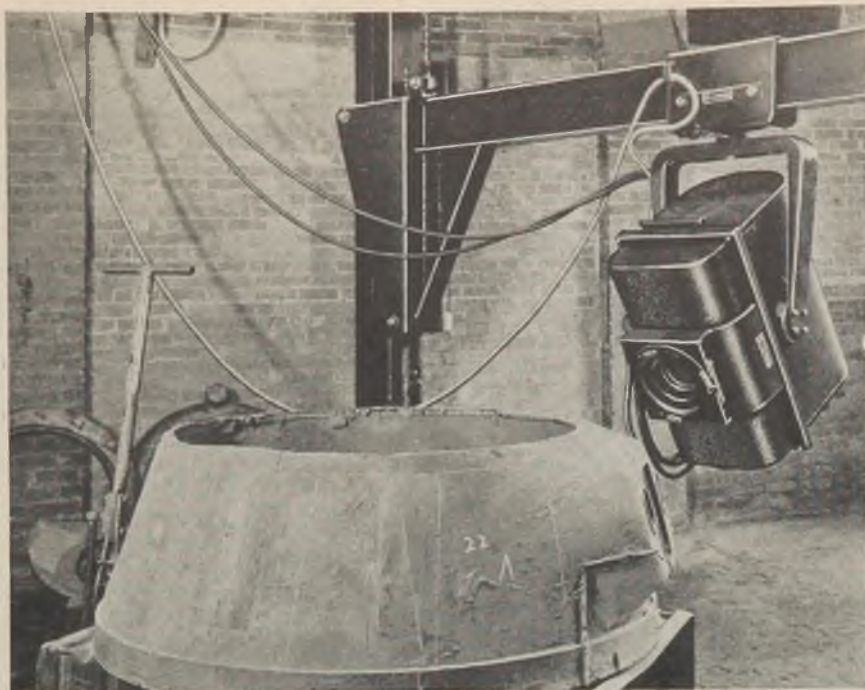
A 250-kilovolt machine positioned for X-ray inspection of tank turret. Tube is angulated to cover the area of inspection and moves on a jib-crane. Photo courtesy of Picker X-Ray Corp.
